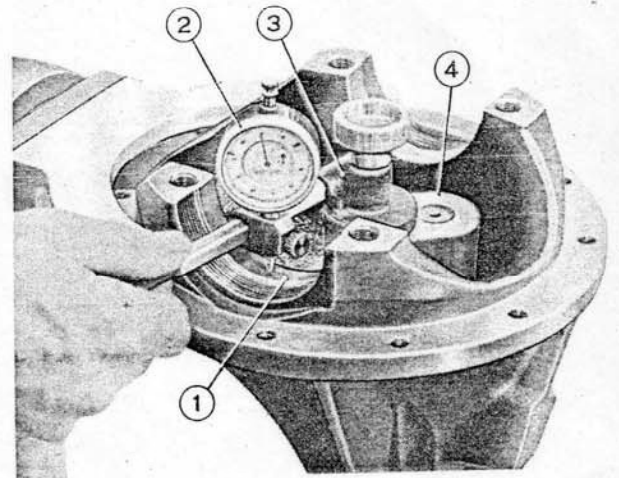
Determining the thickness of bevel pinion thrust washer.
